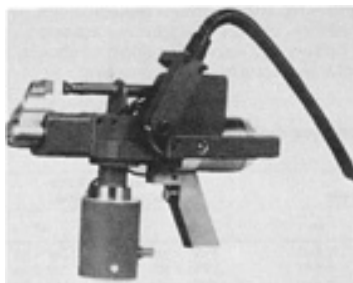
TYPICAL ULTRASONIC LINE WELDER USED FOR METAL TUBE CLOSURE APPLICATIONS
